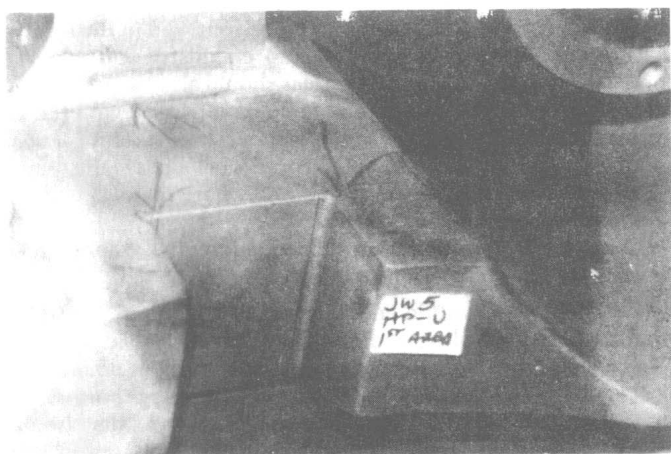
View of Internal Surfaces of Turbine Shell Casting Illustrating Multiple Cracking at Internal Radii.
